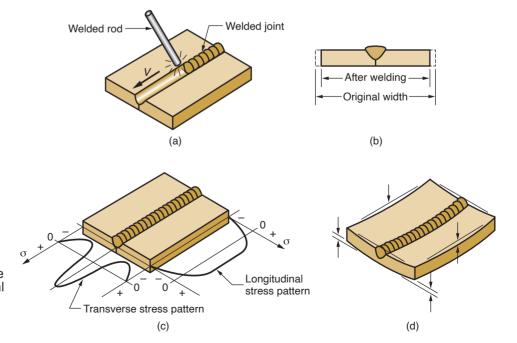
(a) Butt welding two plates; (b) shrinkage across the width of the welded assembly; (c) transverse and longitudinal residual stress pattern; and (d) likely warping in the welded assembly.
